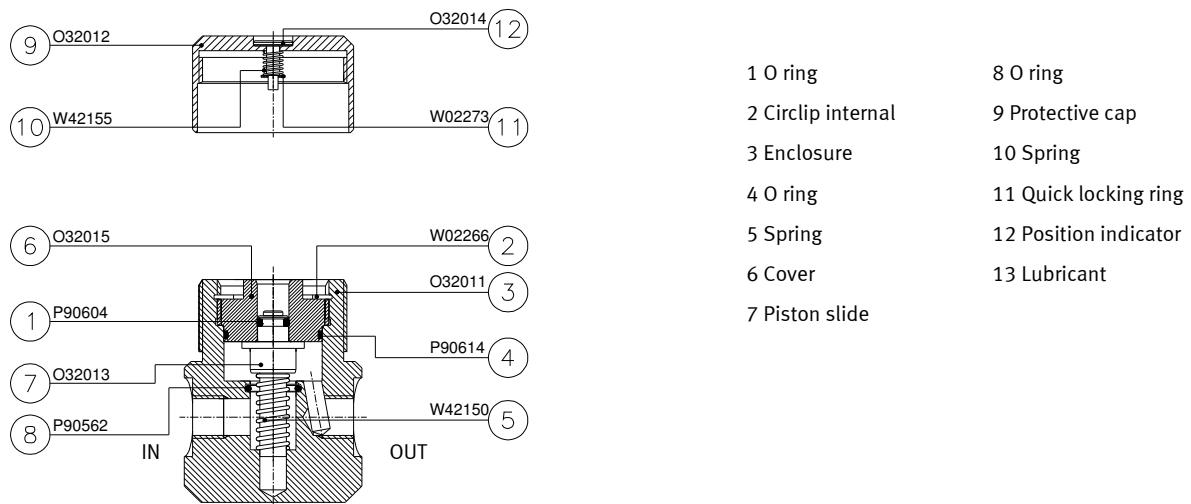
Cross-section of safe diagnosis coupling BDA 06 with part codes marked.
